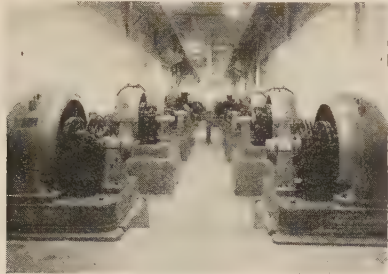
DIRECT-COUPLES MOTORS DRIVING A 234-IN., 1200-FT. PER MIN. NEWSPRINT MACHINE
